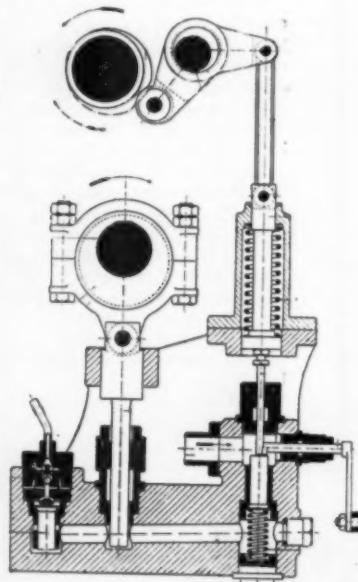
A sectional drawing of one of the four fuel pumps.
